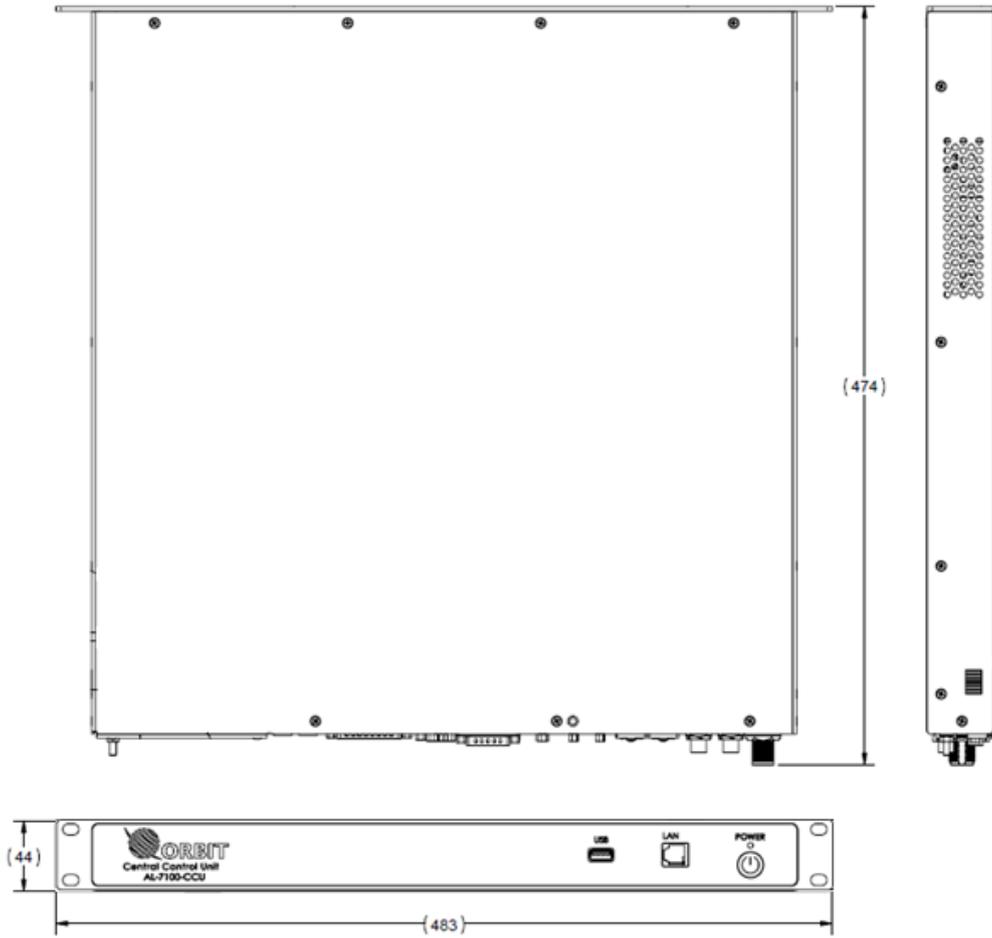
CCU/DSS/OSS 1U Mechanical Dimensions
